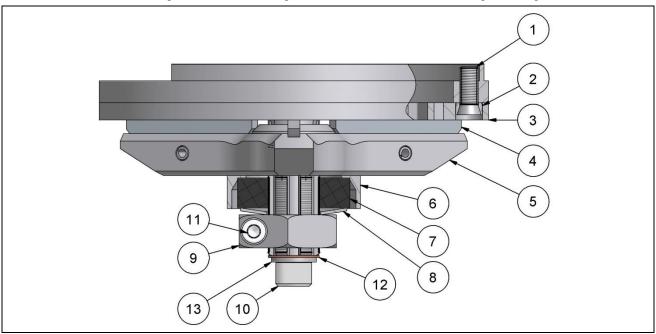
Adjusting preload of cutting blades with preload locking nut and spring washer
